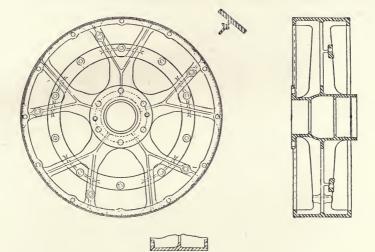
Spoke Type Cast-Steel Rear Wheel.
